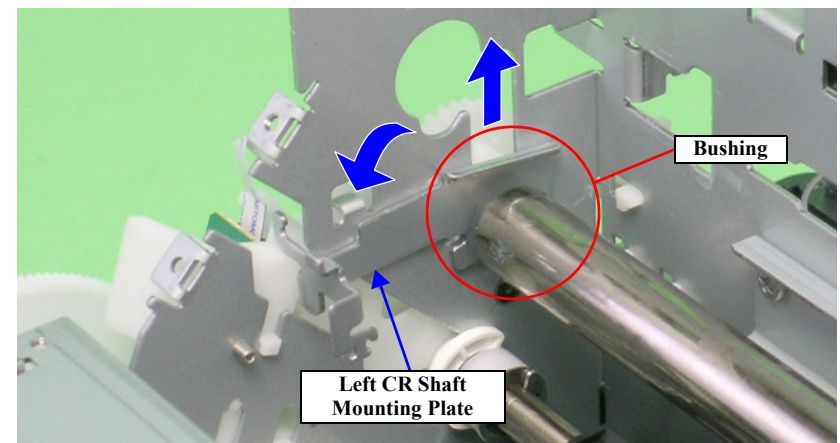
Removing the Left CR Shaft Mounting Plate
